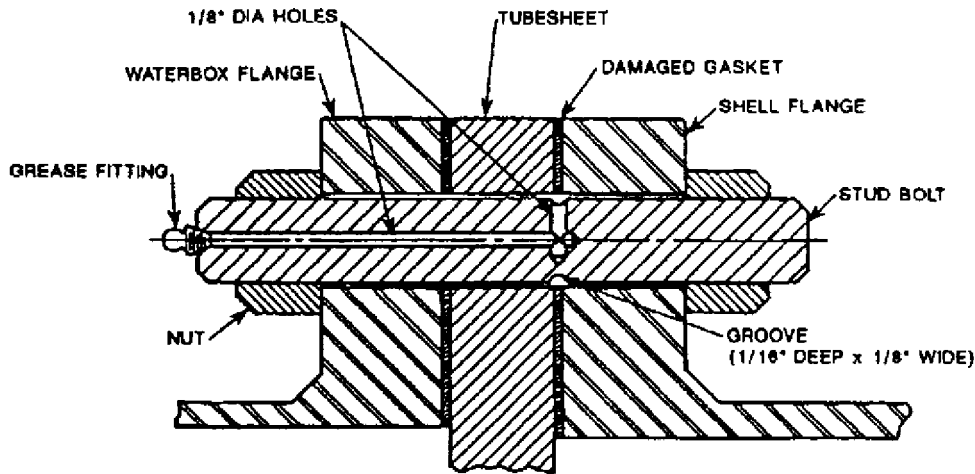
Shell Flange-to-Tube Sheet Gasket Repair
